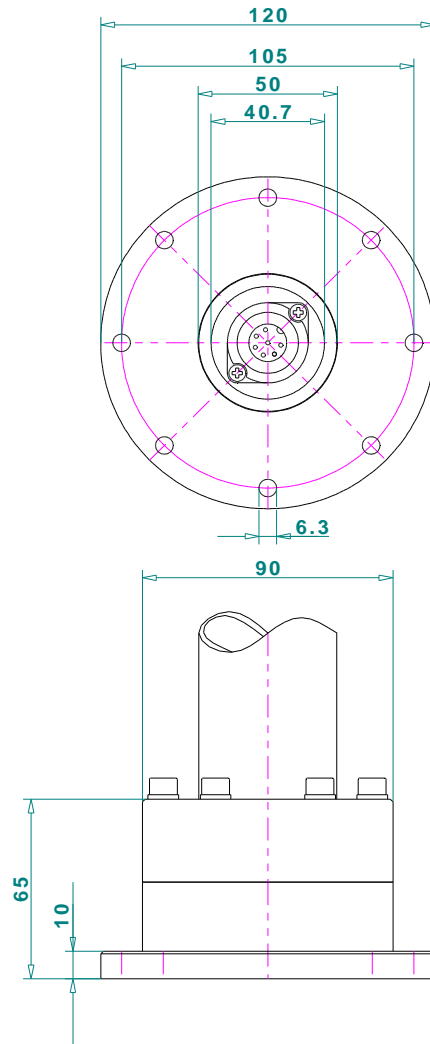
Antenna Unit, mast flange (mechanical dimensions)
